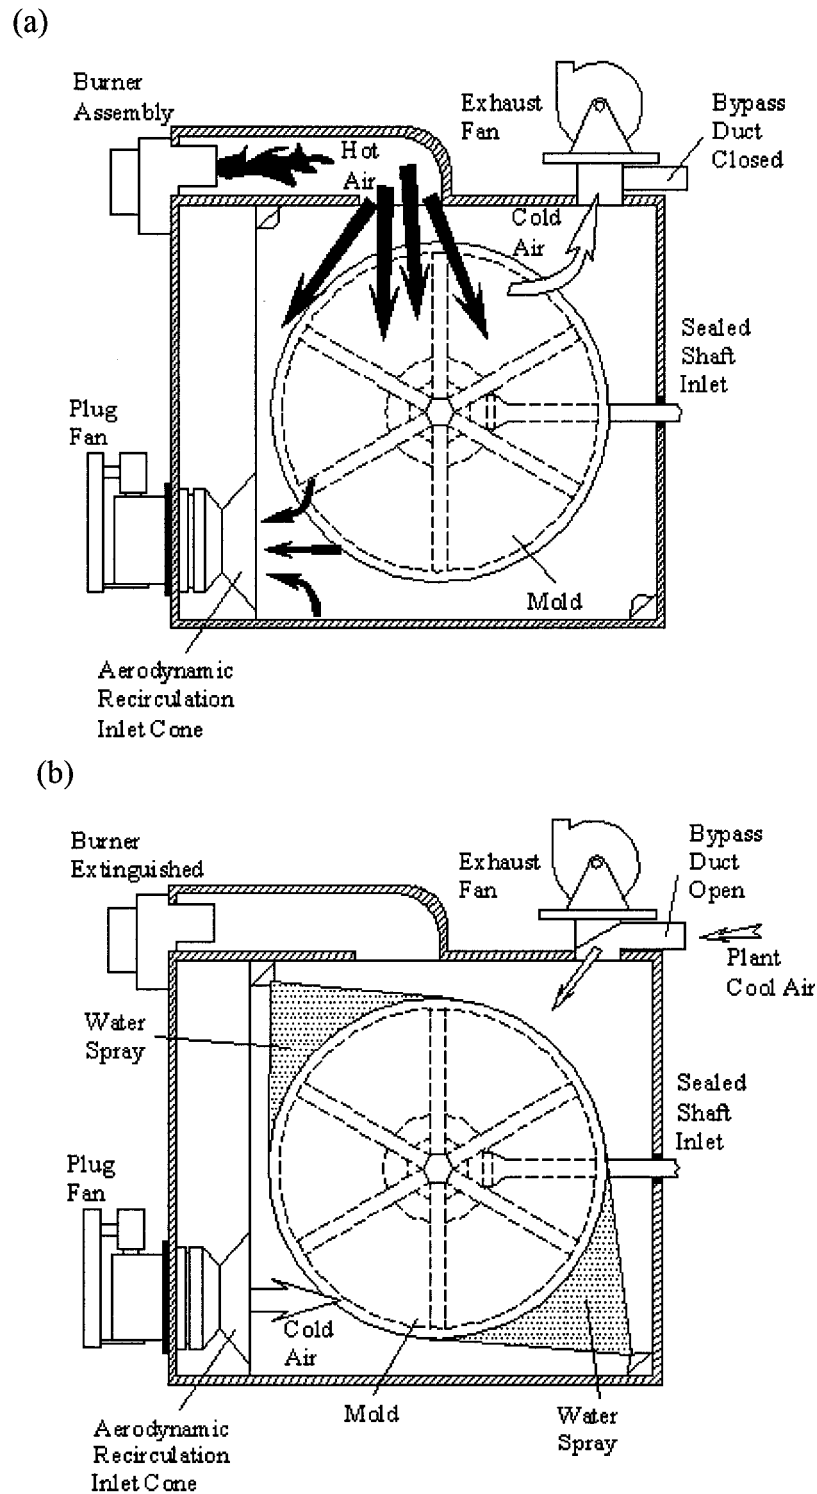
A schematic of the principle of operation of a single arm, single station, clamshell-style rotomolding machine
